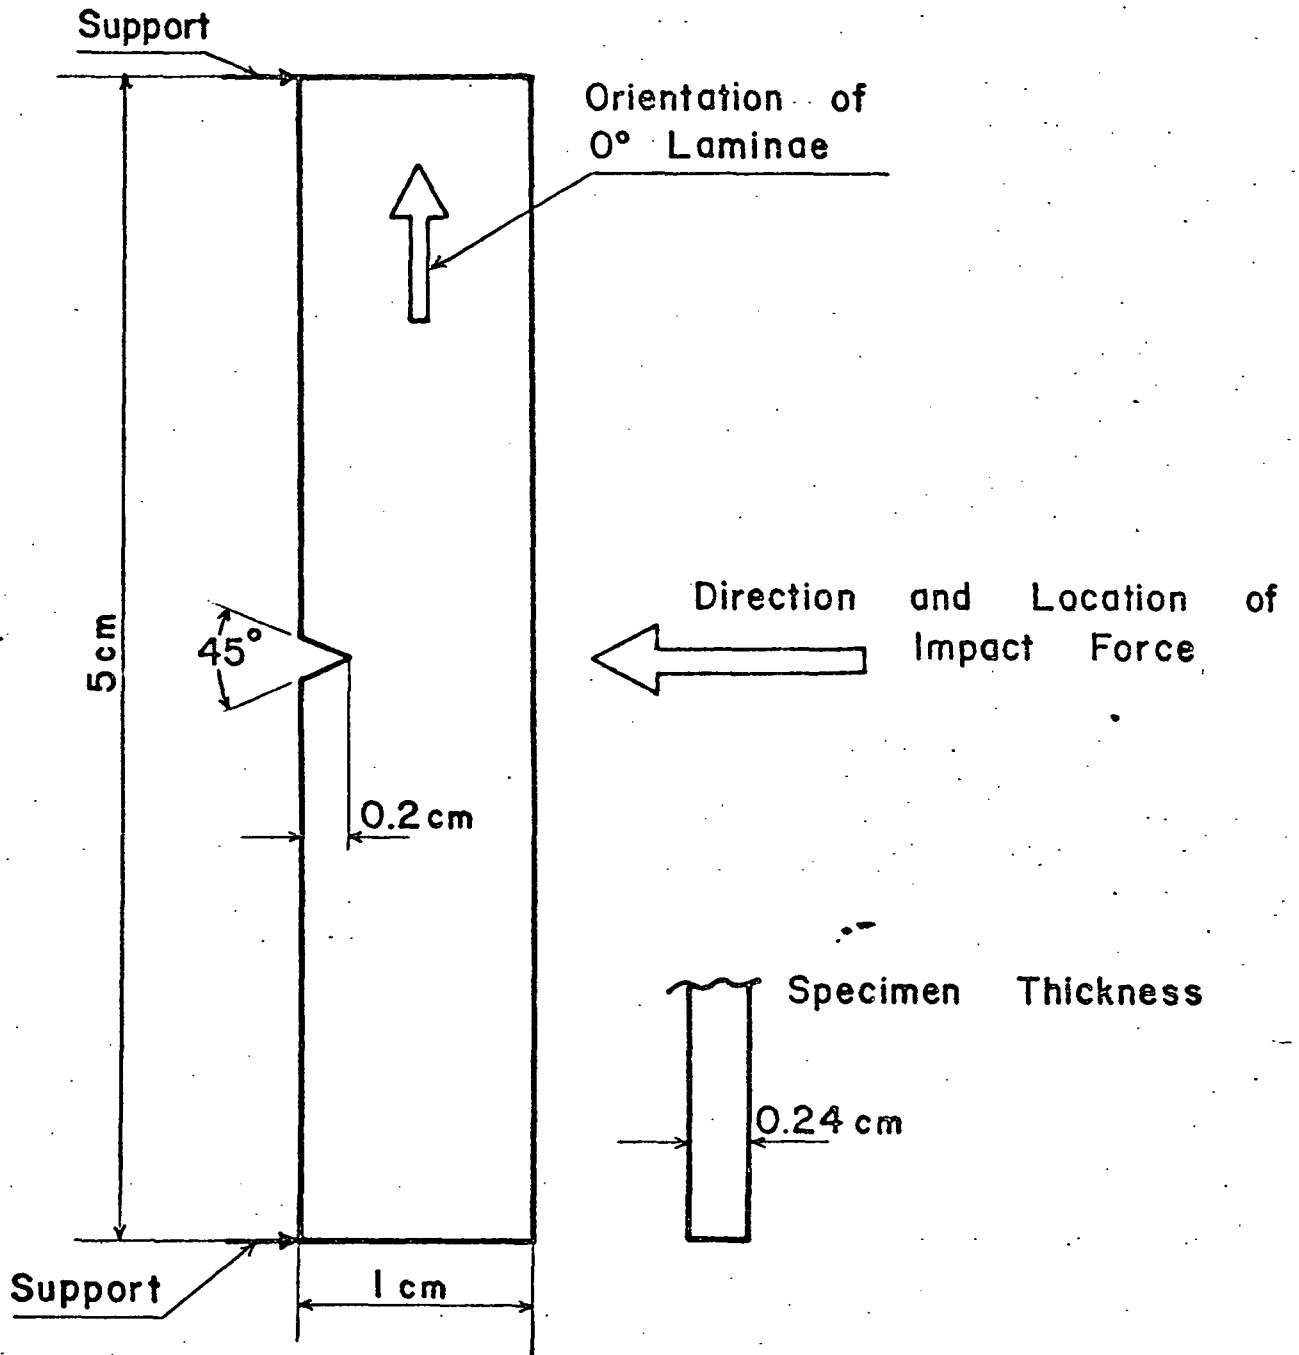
Sketch of impact specimen showing geometry, orientation, loading and support.
